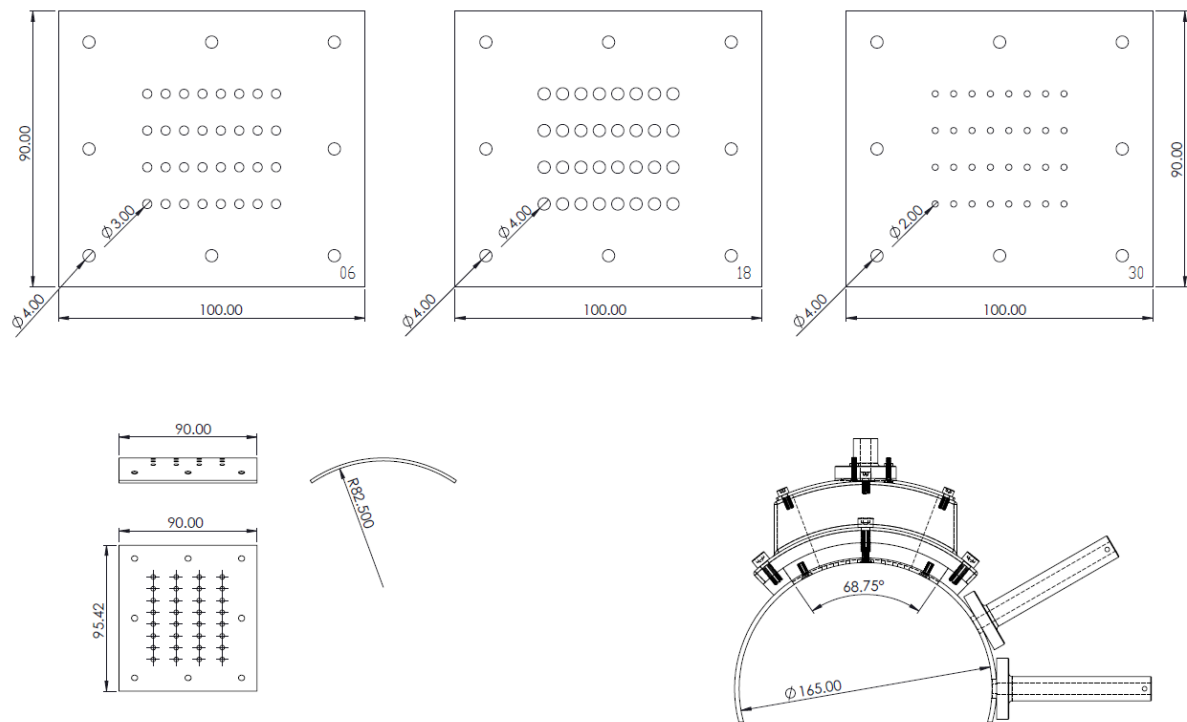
Engineering drawings showing distributed resonator inner plate manufacturing and assembly requirements
